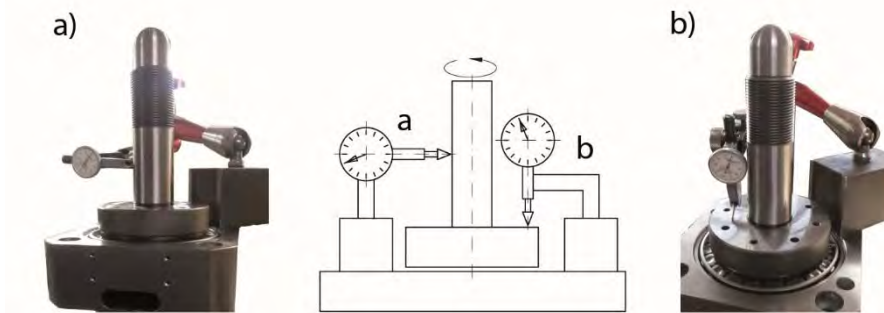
Worm gear shaft verifications; (a) Eccentricity; (b) Reference surface flatness.
